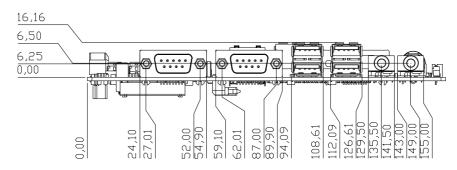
MIOe-DB2000 Mechanical Drawing (Rear I/O)
